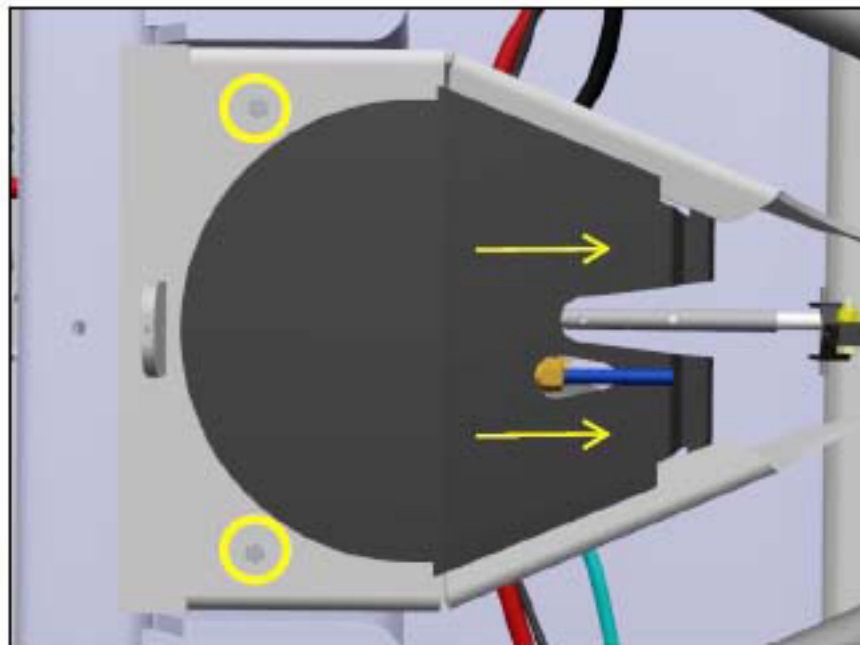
Dust Pan Removal to Access the Front Harnesses
